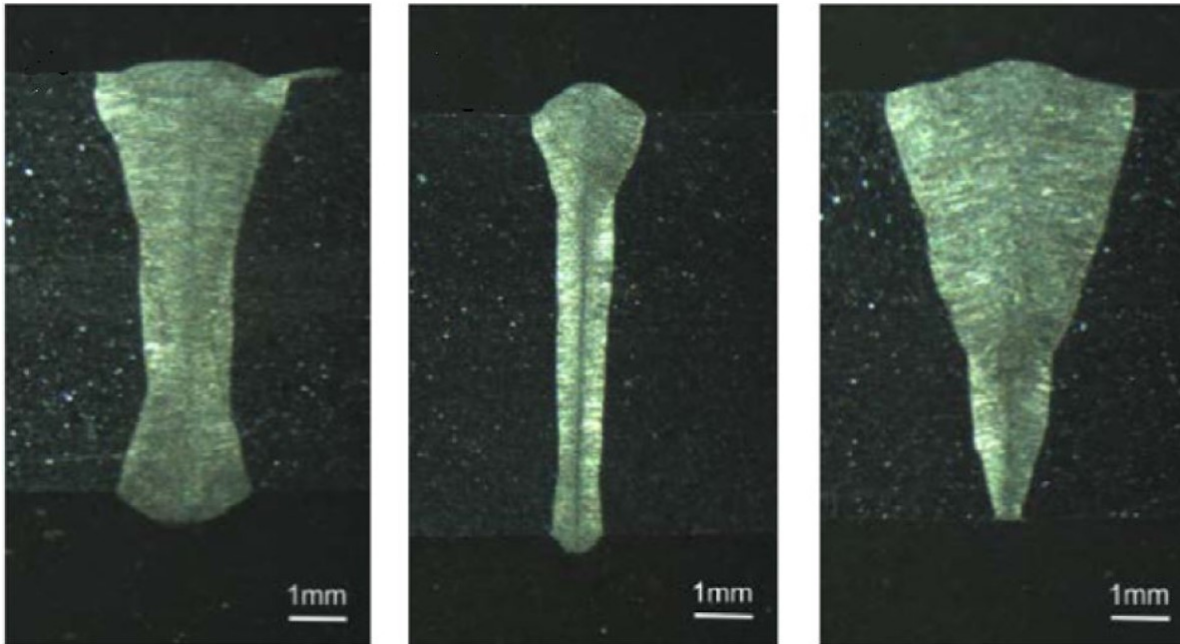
Laser weld bead geometries: Peanut shape, nail-shape, V-shape (Liu et al., 2017)
